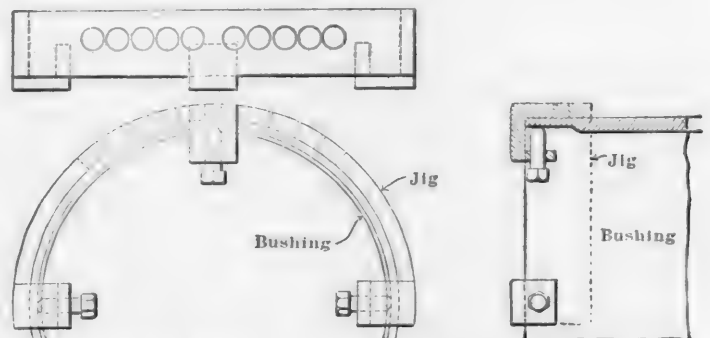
JIG FOR DRILLING STEAM PORTS IN CYLINDER BUSHINGS.
